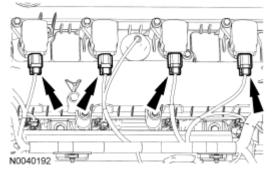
Locating Coil-On-Plug Electrical Connectors Courtesy of FORD MOTOR CO.
